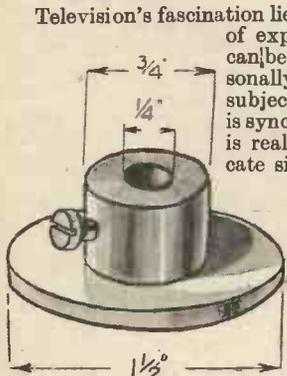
The steel boss flanged on one side which is used to construct the cogged wheel.
